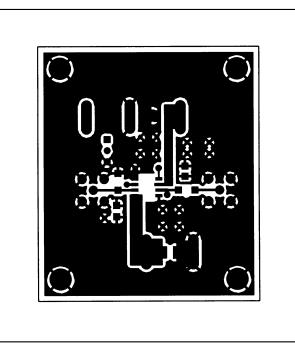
MAX4278 EV Kit PC Board Layout—Component Side
